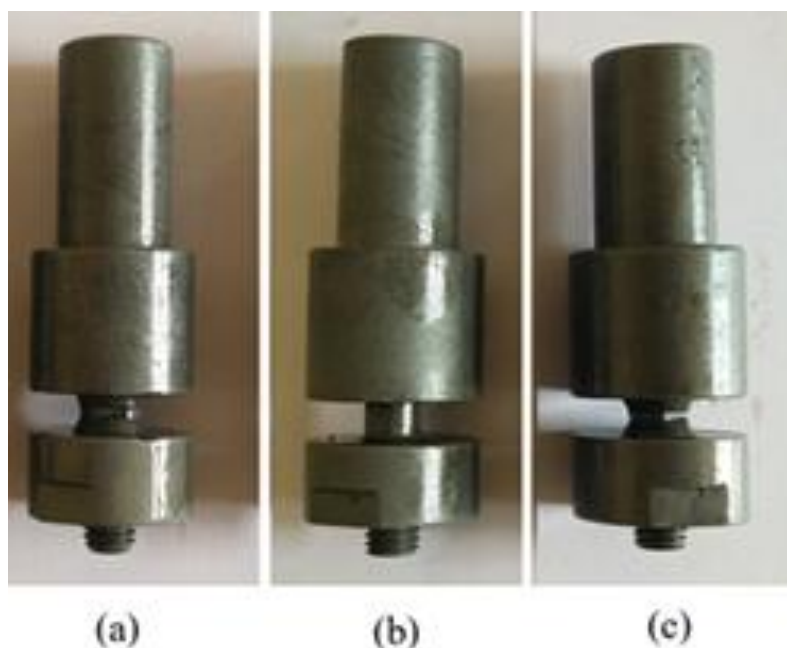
Actual images, (a) Tool-5, (b) Tool-6, (c) Tool-7
